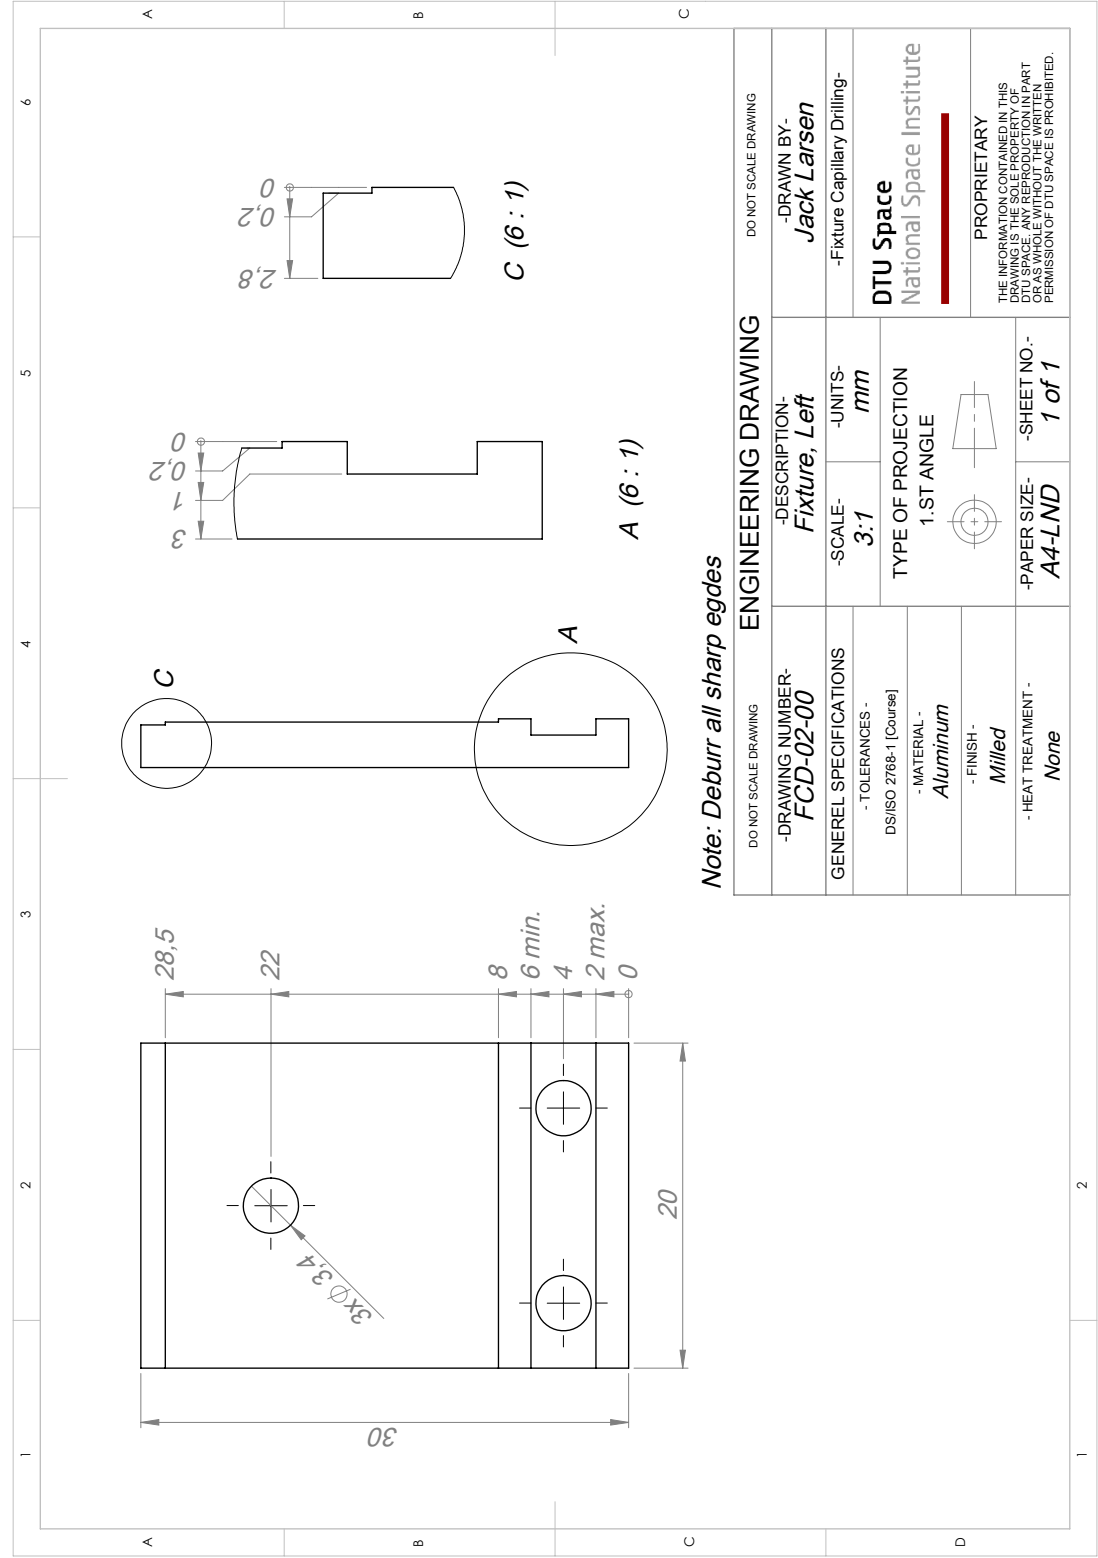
Milling Tools: Fixture for capillary drilling, left
